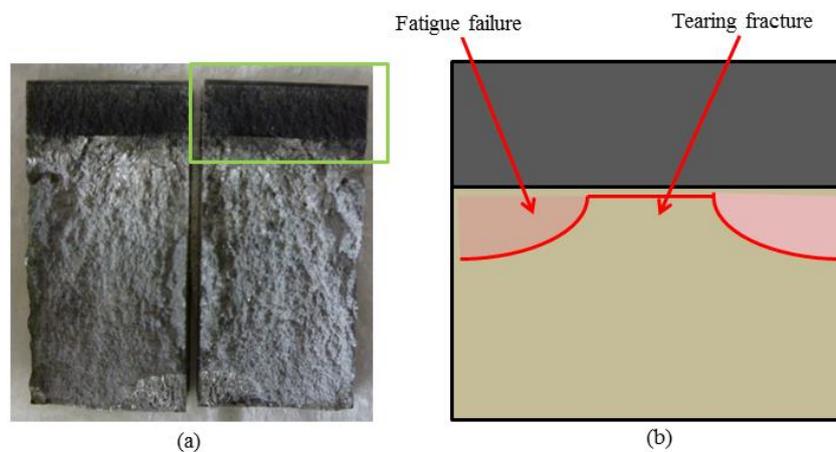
(a) Fracture surface of the bi-material, (b) Schematic illustration shows different types of fracture in bi-material.
